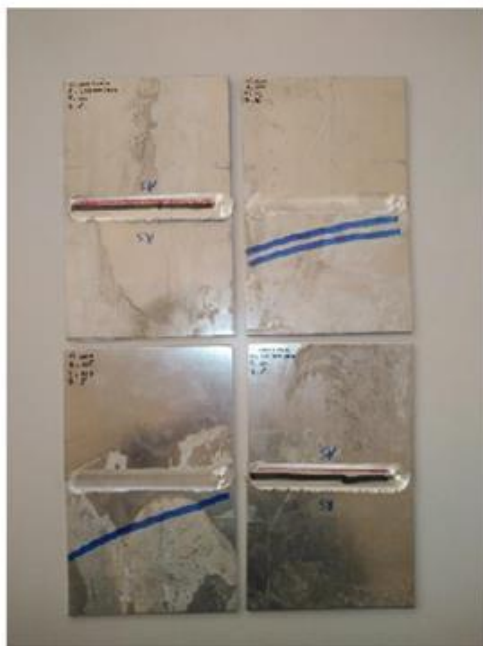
Example of welded joints obtained with different welding speed
